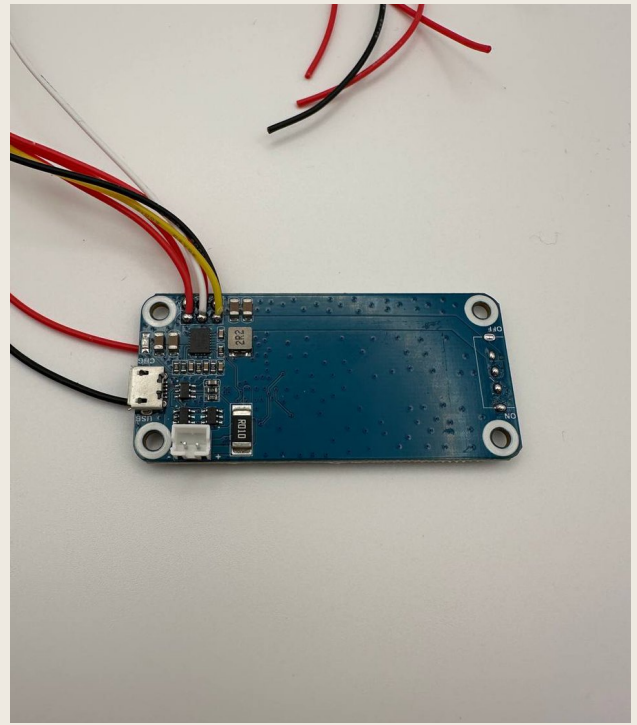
UPS HAT (C) prep: the factory GPIO header and onboard switch are desoldered; wires go straight to the pads (FIG. 04-2) – the HAT does not fit the shell otherwise.
